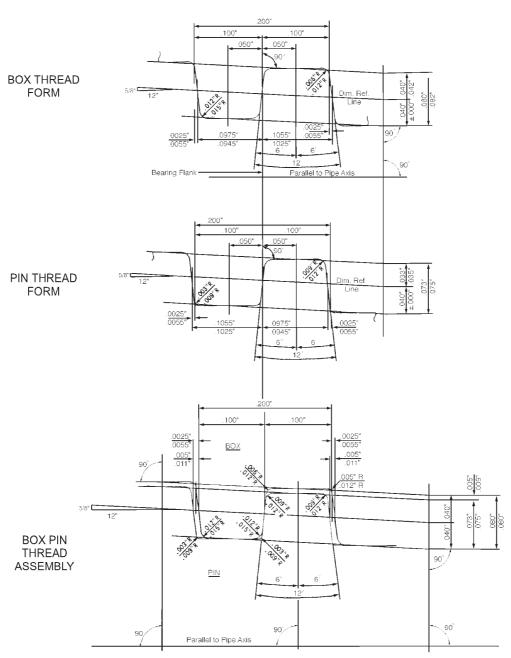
Product Thread Form—Sizes $8^5/8$ through $10^3/4$ 5 Threads per in.— $1^1/4$ in. Taper per ft on Dia.
